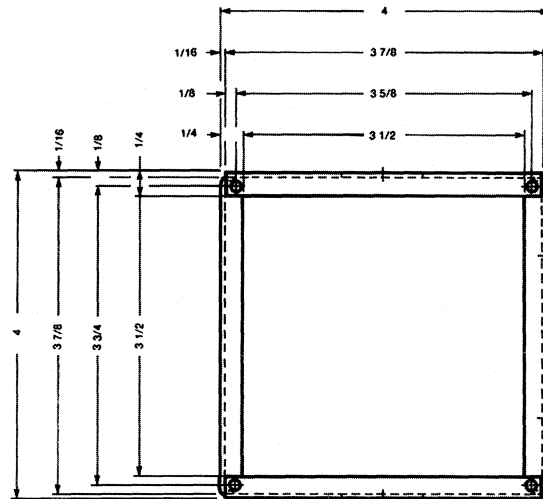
Sheet Metal Enclosure Used for Electronics Packaging
